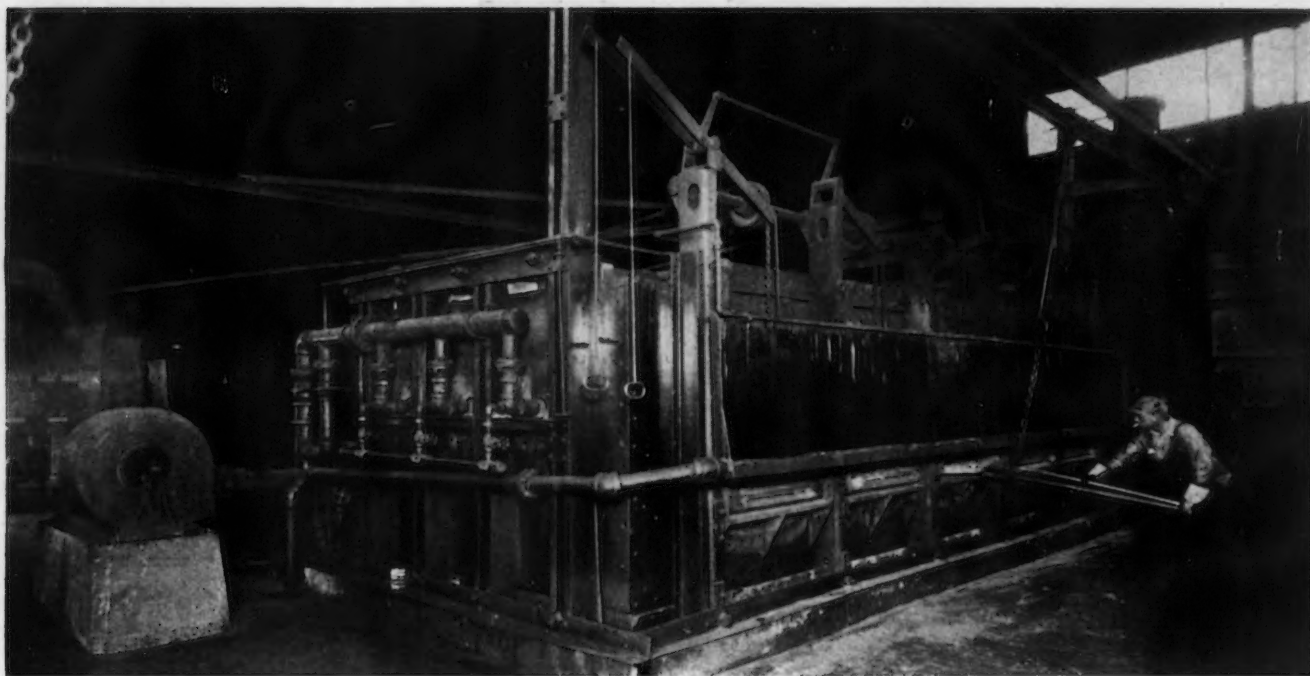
Gas fired forging furnace equipped with older type of nozzle mixing gas burner. This was converted from oil burning. A single blower supplies air to all the burners. A potentiometer type thermocouple control automatically regulates the temperature.
